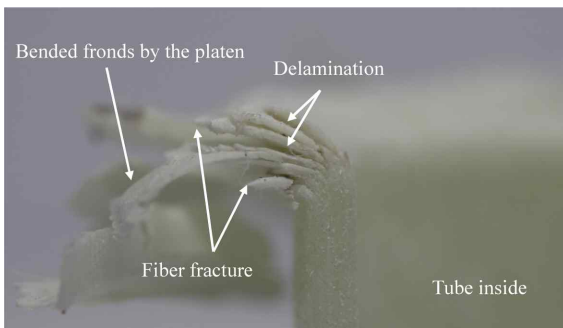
Cross sectional view of the crushed UD glass/epoxy tube
